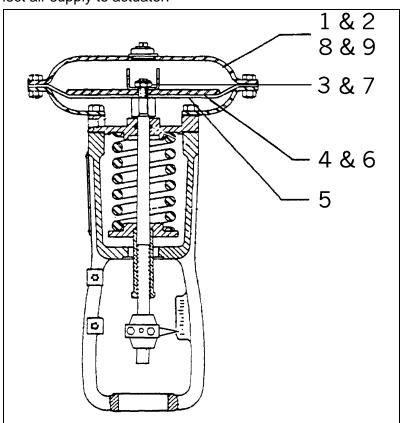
Diaphragm Replacement, Air-to-Open (Reverse Acting) Actuator
